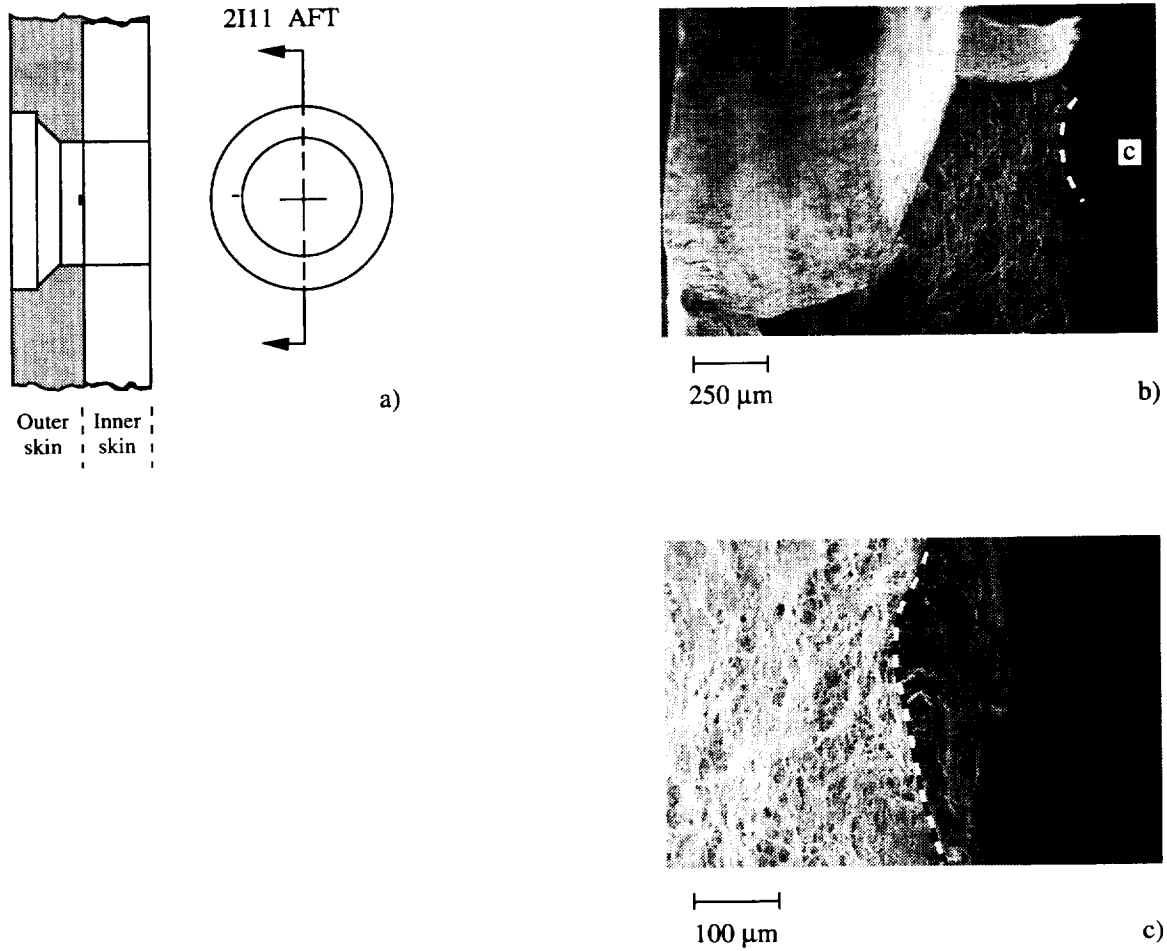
a) The schematic shows the rivet hole 2I11 configuration and the location of the outer skin fatigue crack oriented in the aft direction and about the 9 o'clock position. b) The SEM micrograph shows a small elongated fatigue crack located at the faying surface. The dashed line marks the fatigue crack front. c) The SEM micrograph shows the small fatigue crack contained in the clad layer at high magnification, region "c" in Figure 7.28.b. The dashed line marks the fatigue crack front. The crack initiated in a roughened region along the faying surface.
